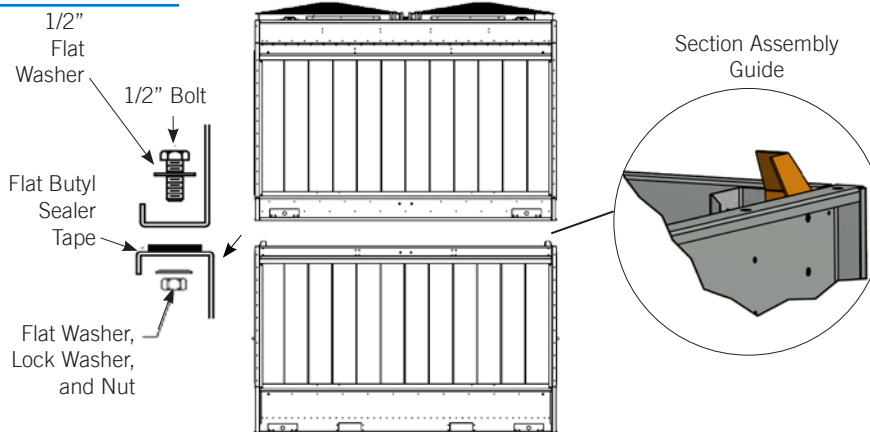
Upper and Lower Assembly for Series 1500E Cooling Towers
